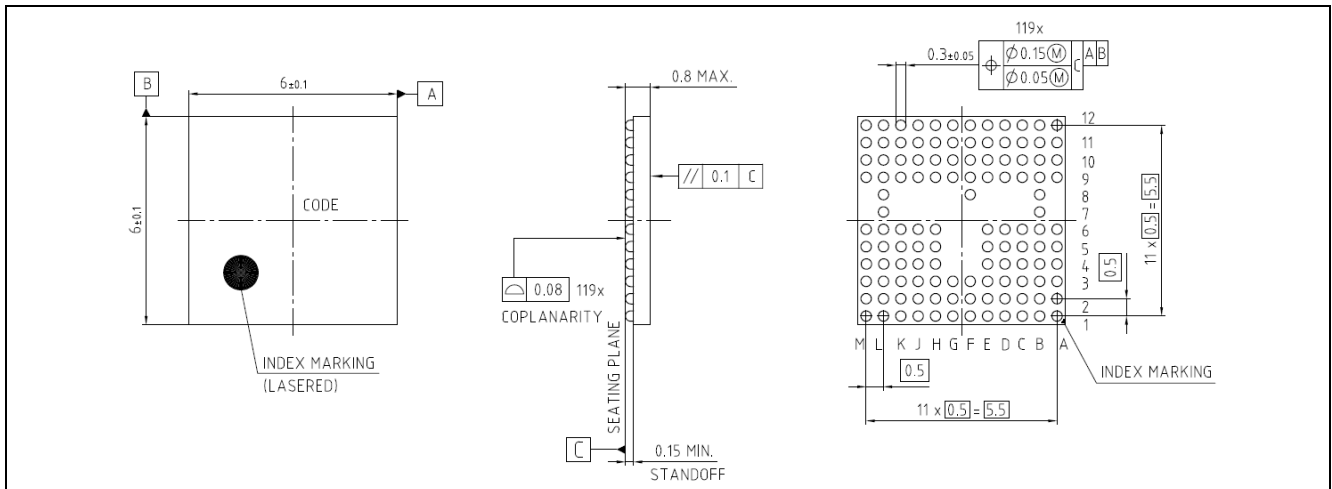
Dimension of eWLB Package PG-WFWLB-119-1 for BGT80 (left: top view; center: side view; right: bottom view)
